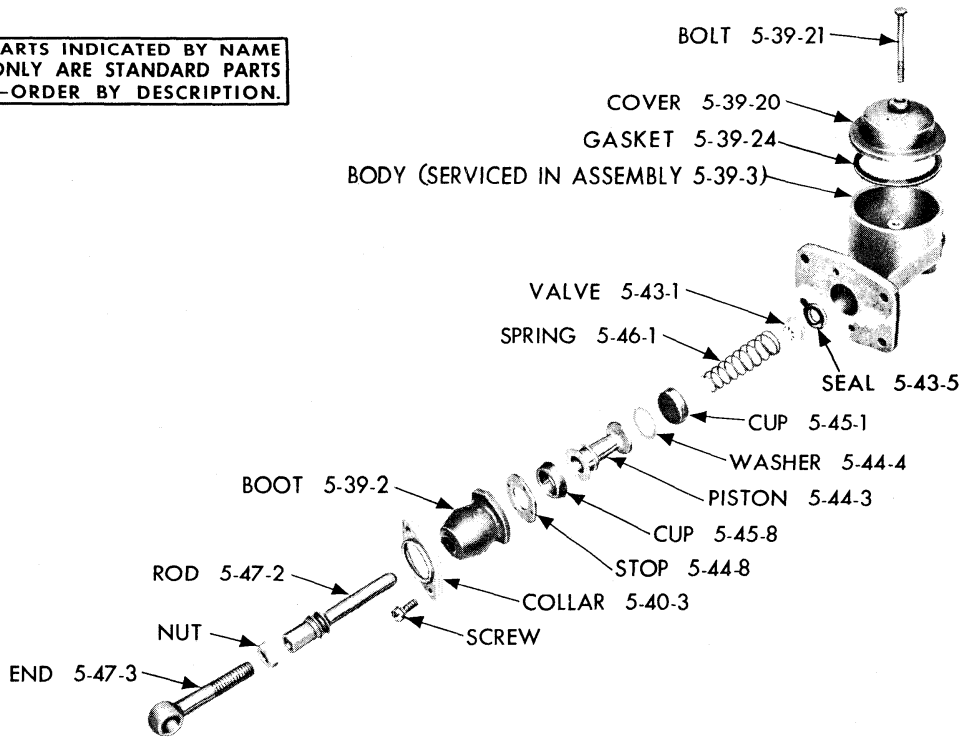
FRONT WHEEL BRAKE CYLINDER (USED WITH TOTAL CONTACT TYPE BRAKES)
